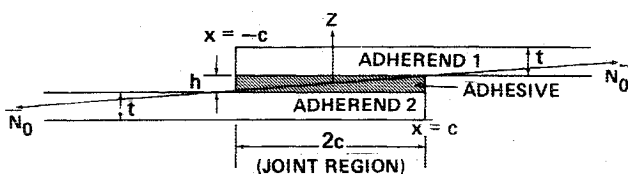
Geometry of undeformed single-lap adhesive joint.
